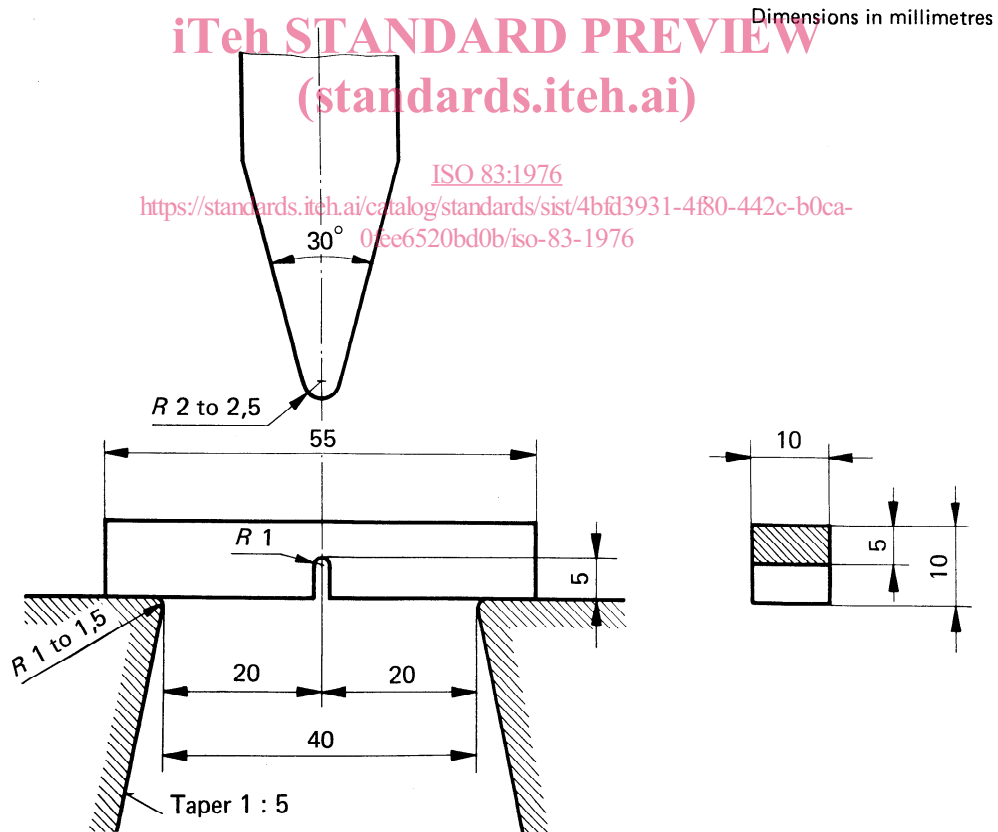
Charpy impact test (U-notch) – Dimensions
